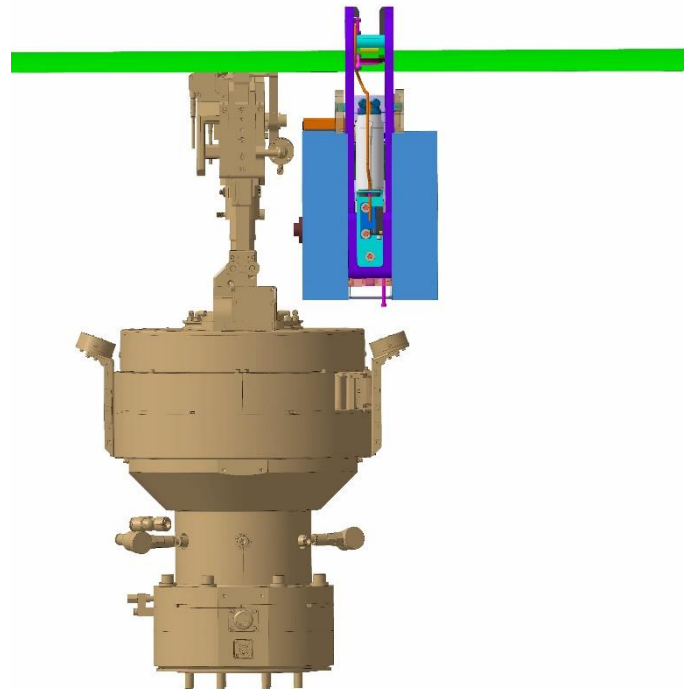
Top view of post shown with deep drop machine tooling fully overlapping back of post.
